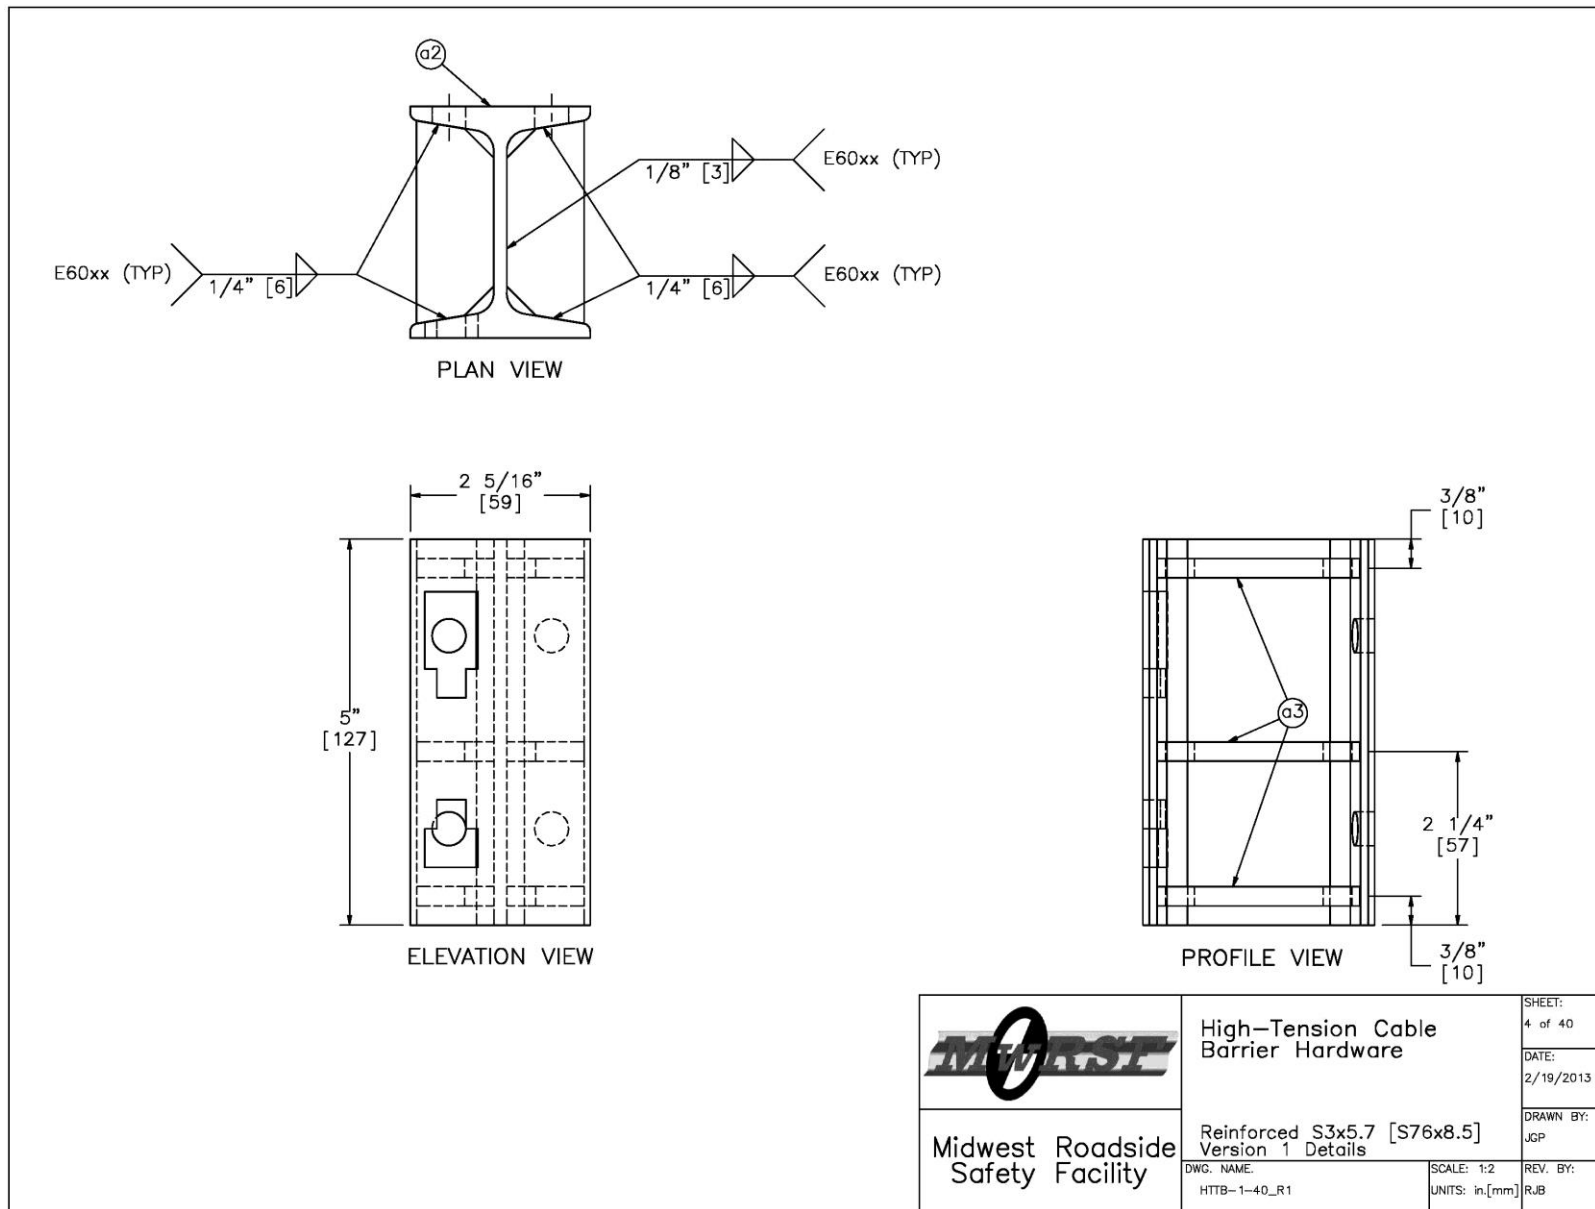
Reinforced S3x5.7 (S76x8.5) Section Version 1 Details, Test Nos. HTTB-1 through HTTB-40
